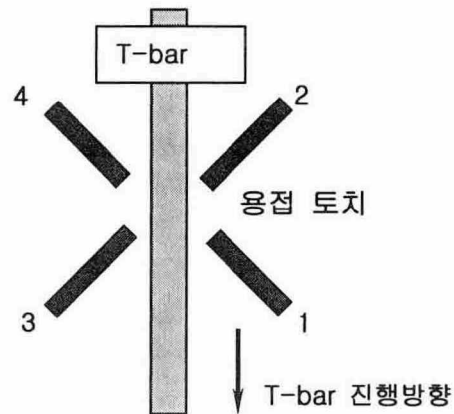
Schematics of automatic welding machine for the T-shaped built-up beams
